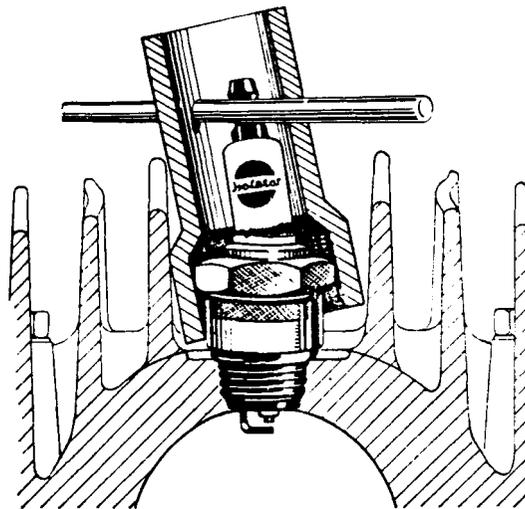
Improper screwing-in or screwing-out of the sparking-plug
